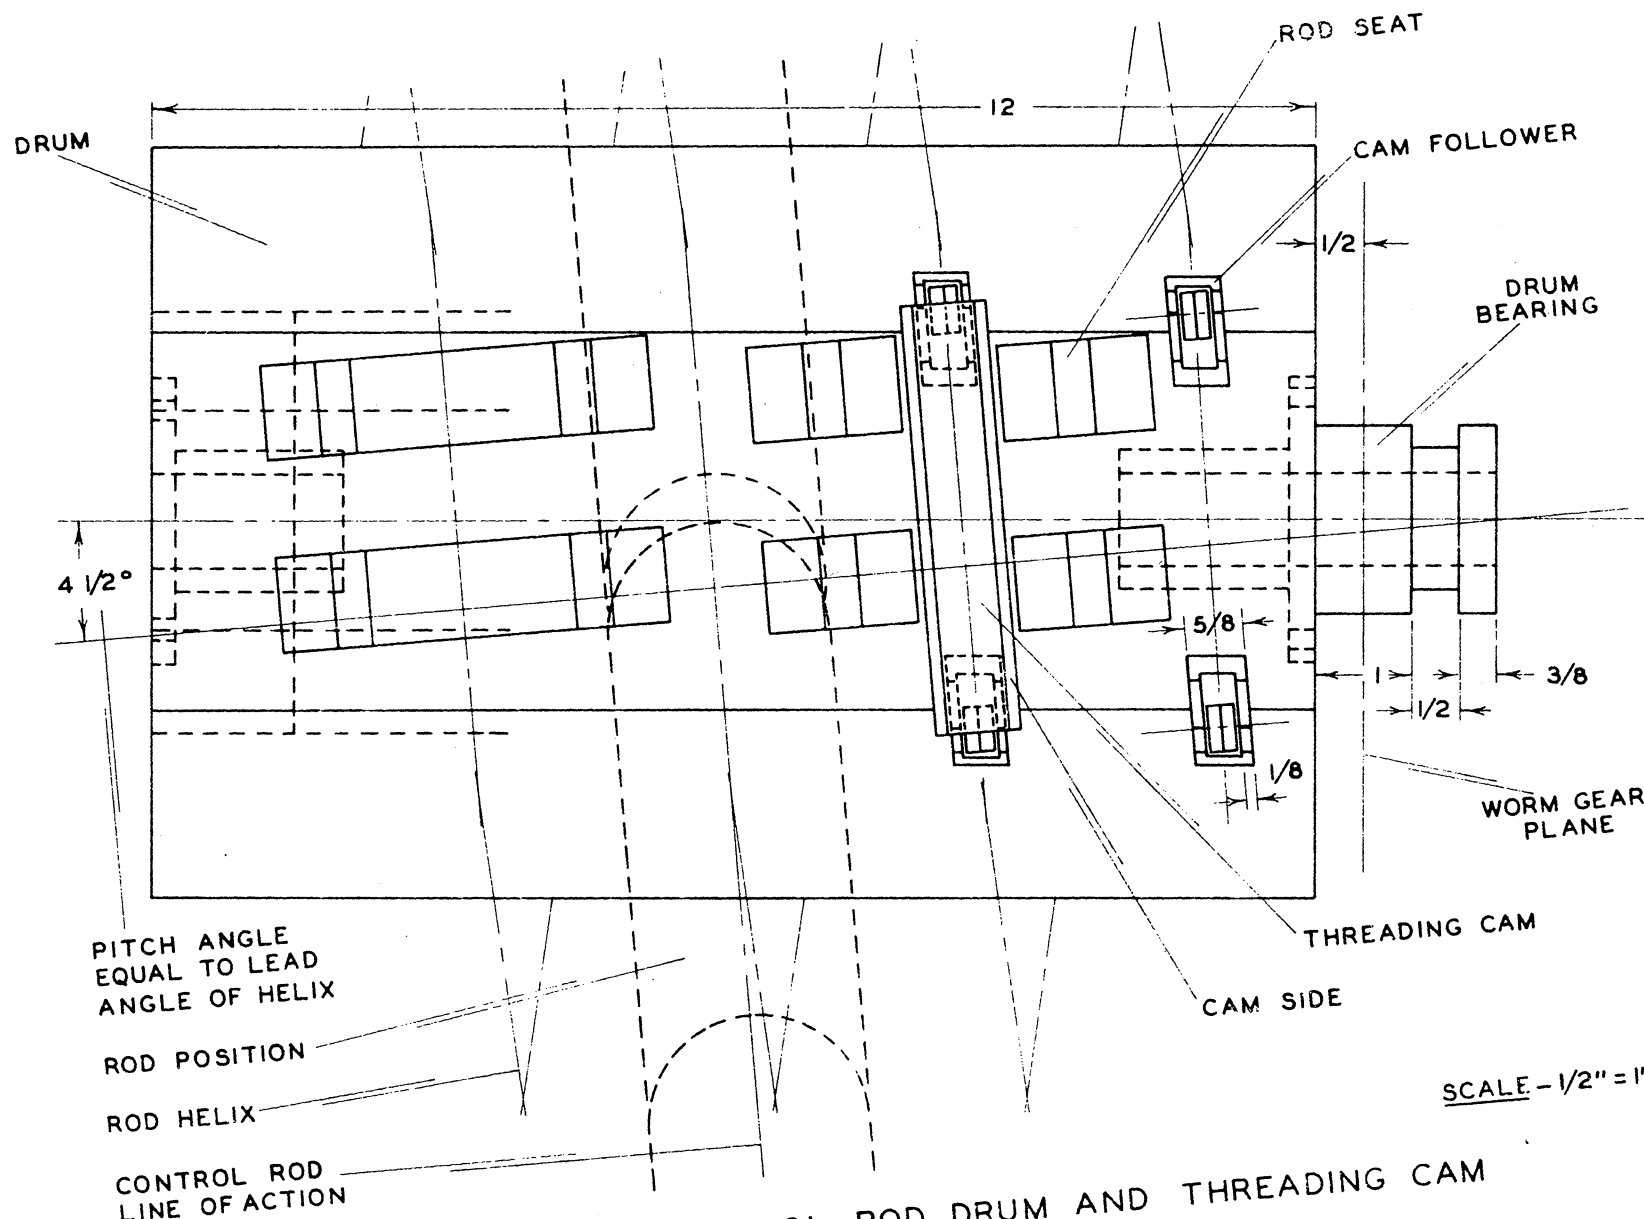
FRONT VIEW OF CONTROL ROD DRUM AND THREADING CAM
